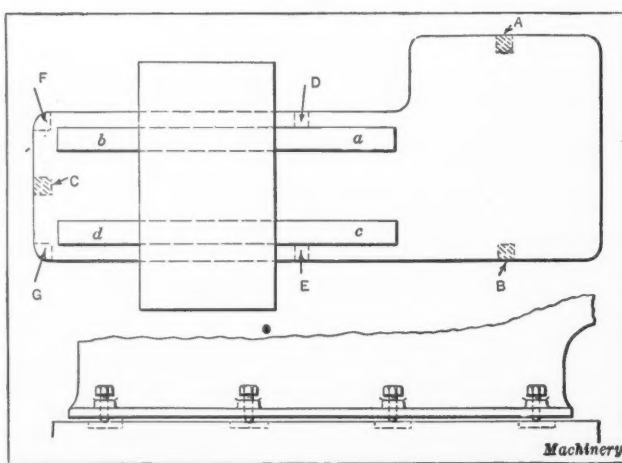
(Upper View) Type of Foot used for Boring Machine; (Lower View) Machine Foot provided with Leveling Screws
